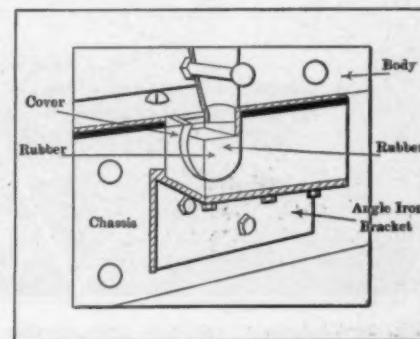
How rubber insert is used between body and chassis to secure easy riding qualities
